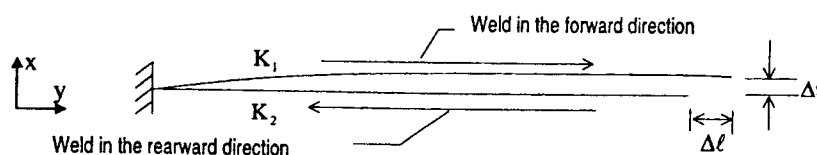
One-dimensional welding of two sheet metal parts
